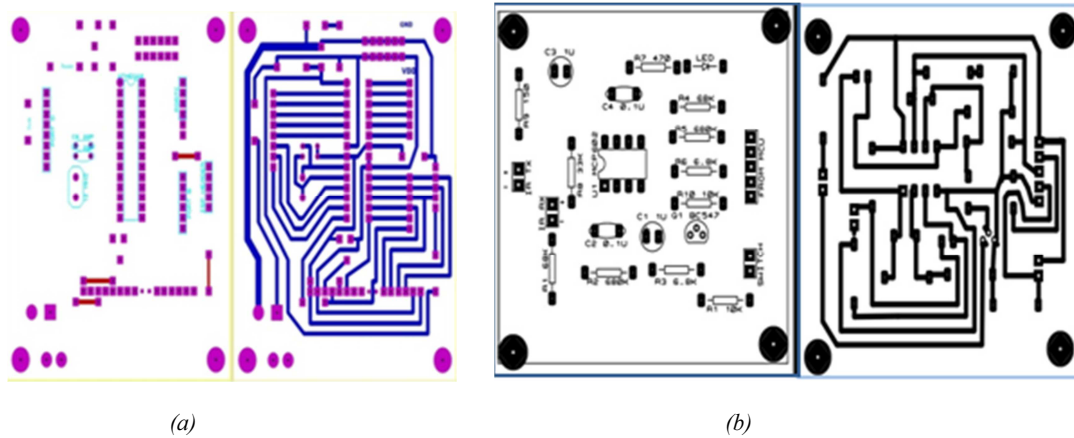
Top And Bottom Surface Of The PCB Layout (A) Microcontroller Unit (B) Sensor Unit
